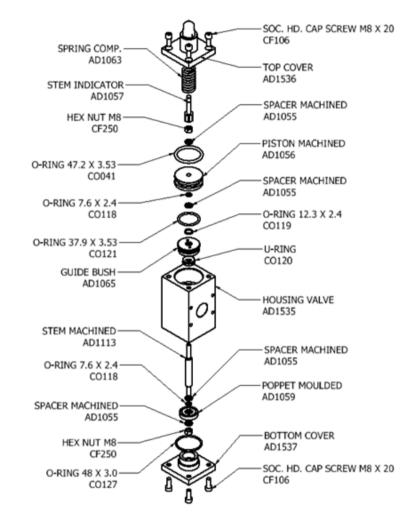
Exploded view of top shuttle-Dryspell Plus 100 & 125
